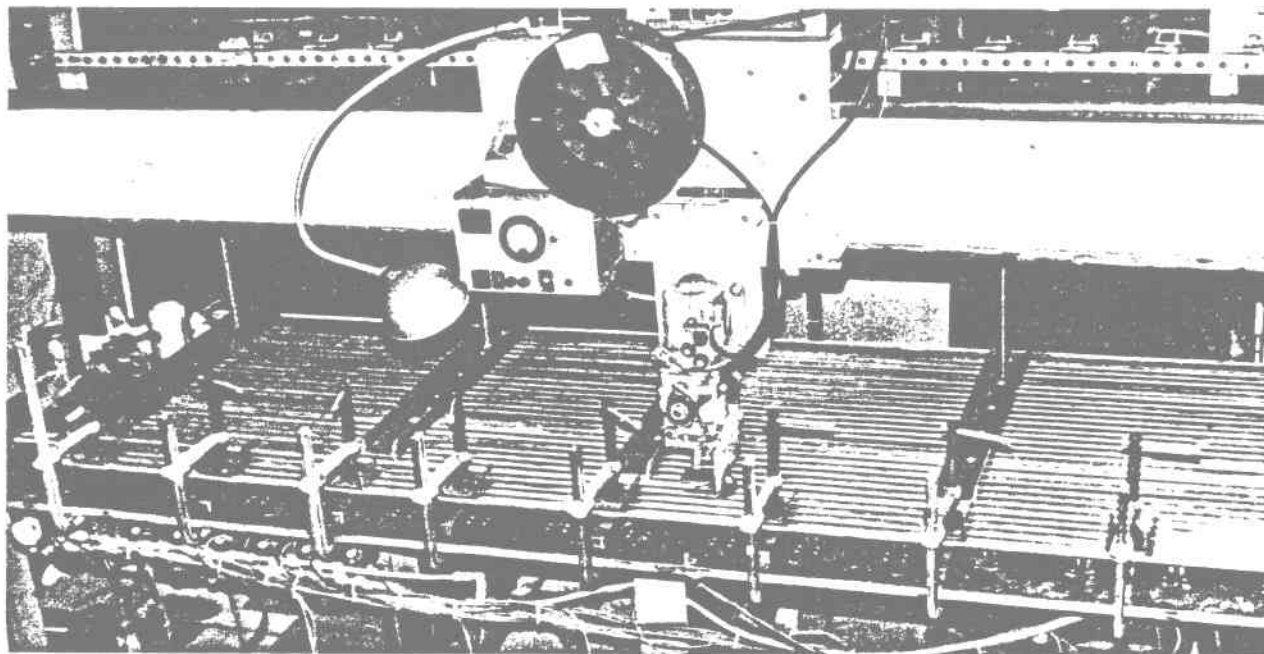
Fixture Employed During Fabrication of Third Development Panel
